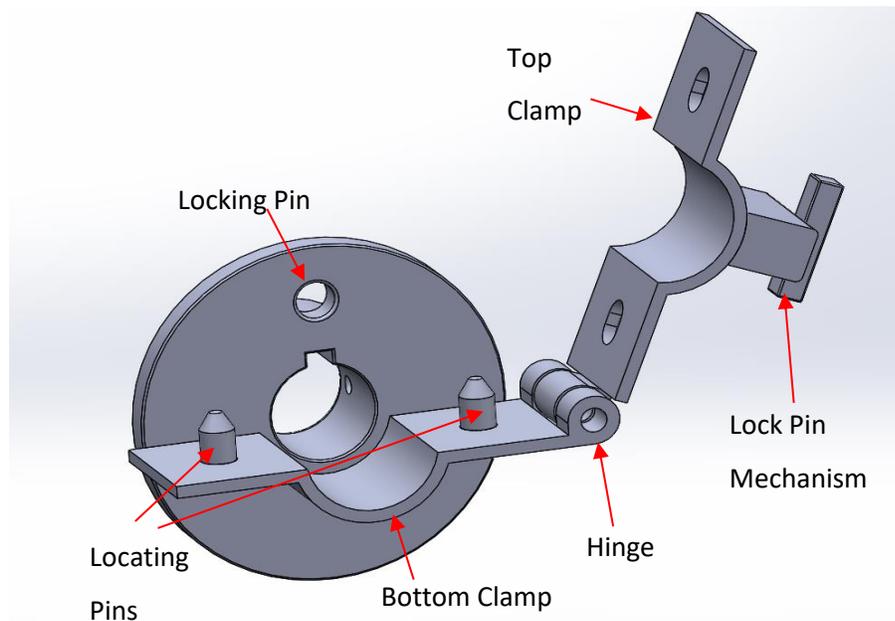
A-Stand Clamping Shaft Opened (Front View)
